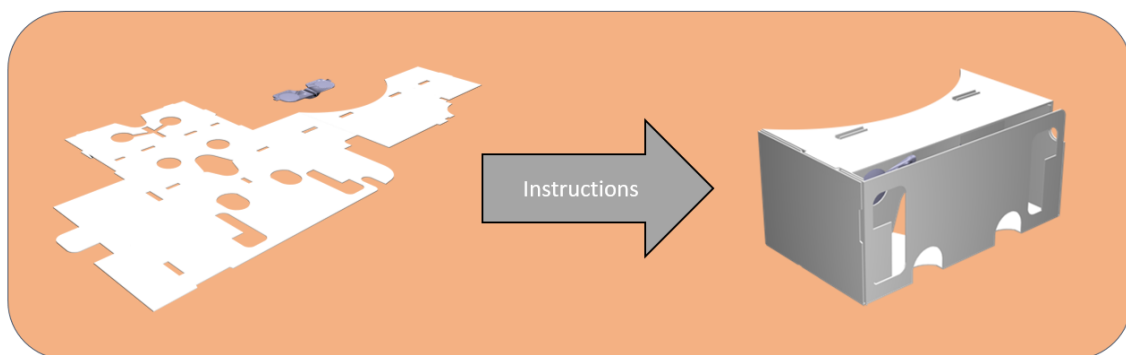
Start and finish-positions of the final assembly, which is the considered operation for the assembly instructions. To the left, the VR-cardboard goggles without waste material and frame together with lenses and the right image shows the desired end-state.
